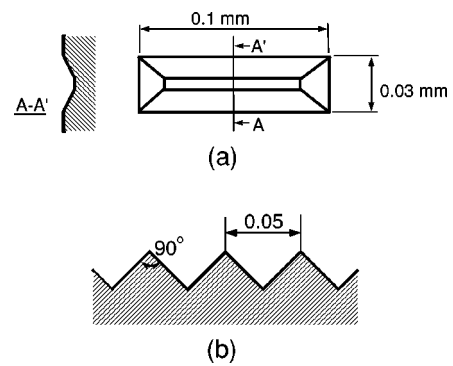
Shape of (a) the microscatterers and (b) the prismatic grooves in units of millimeters.
